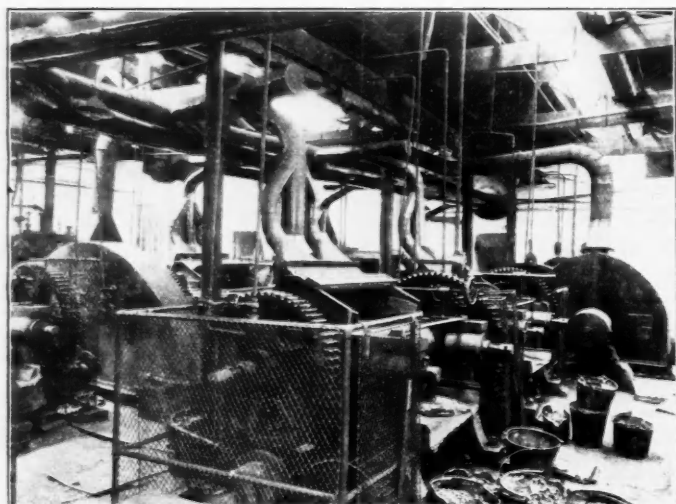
Brierley Dust Removal Plant for Rubber Mixing Mills.
